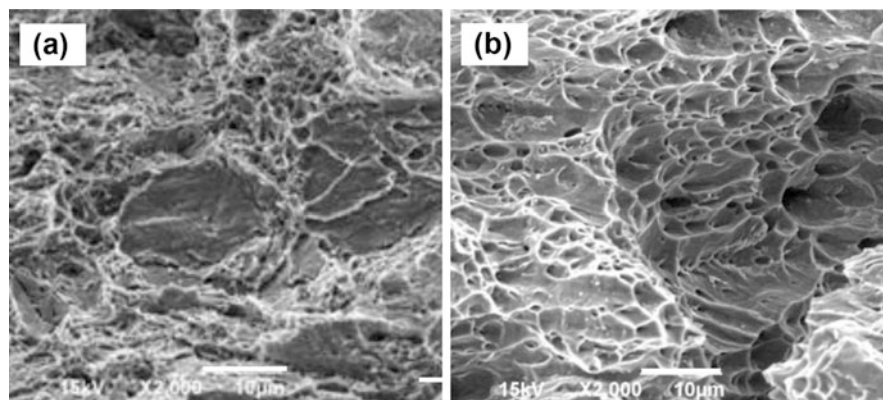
Tensile fracture surfaces of Type 304 stainless steel (a) with and (b) without hydrogen charging (Hatano et al. [52])
